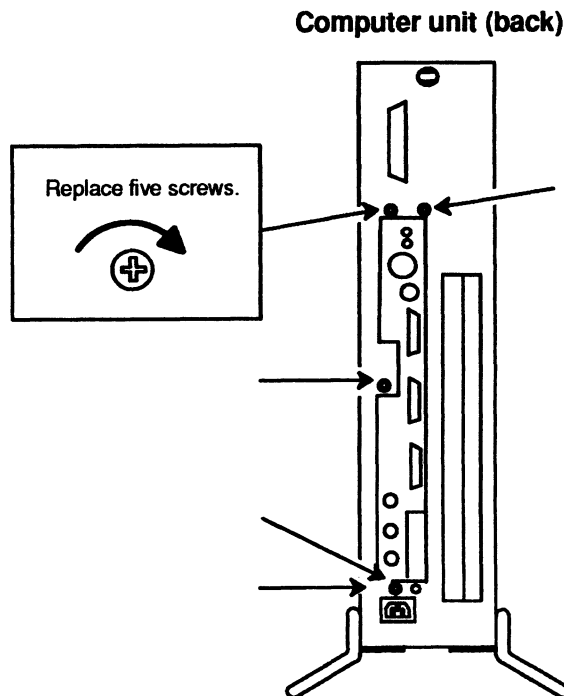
Installing the Screws that Secure the System Board Bracket to the Back of the Computer Unit
